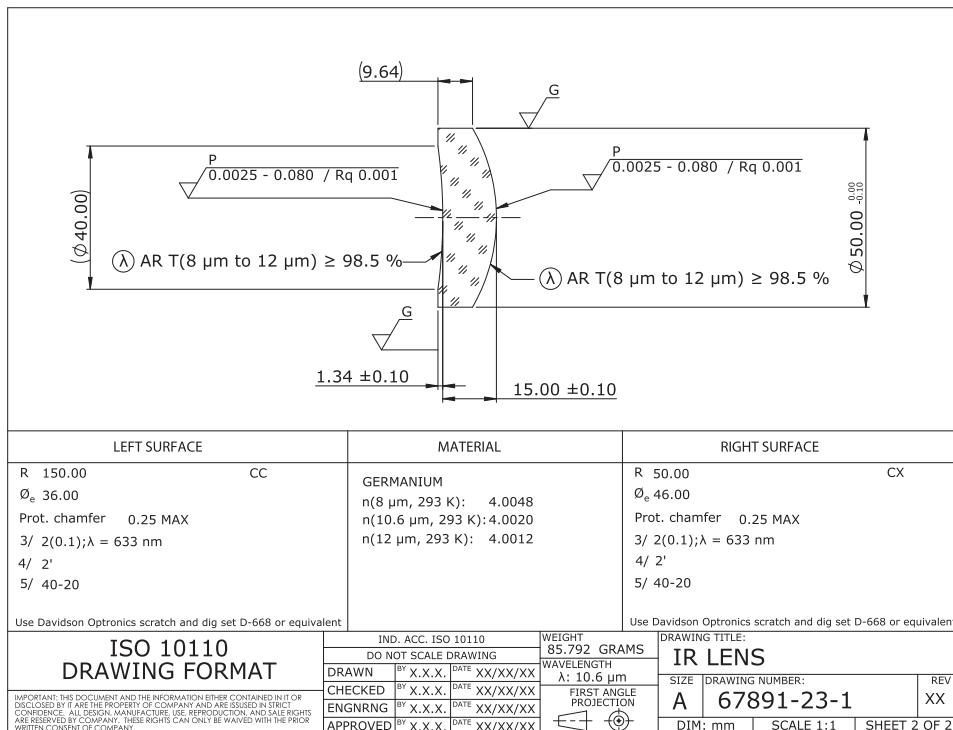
ISO 10110 drawing with the datum implicitly defined in the table field.
